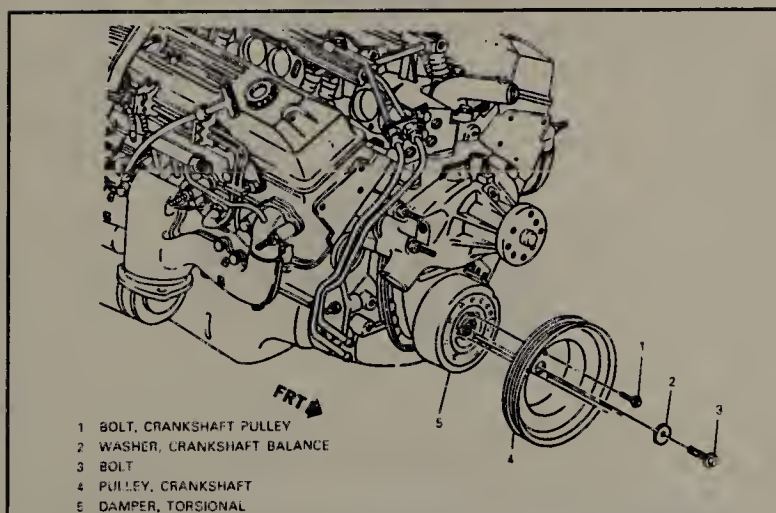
Exploded view of the crankshaft torsional damper—1989 5.7L (VIN 8) engine shown
